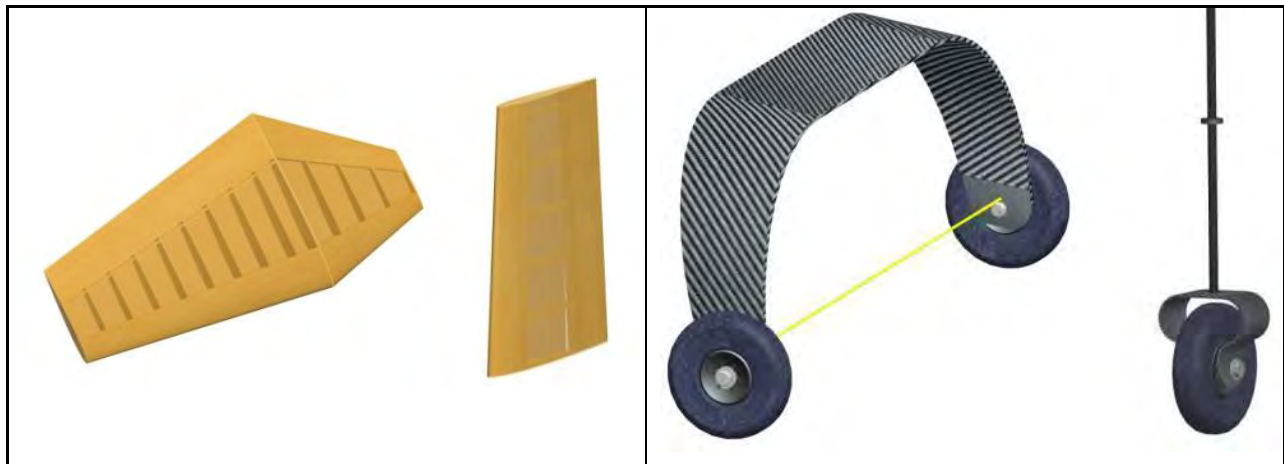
Empennage [a] and Landing Gear [b] CAD Drawings
